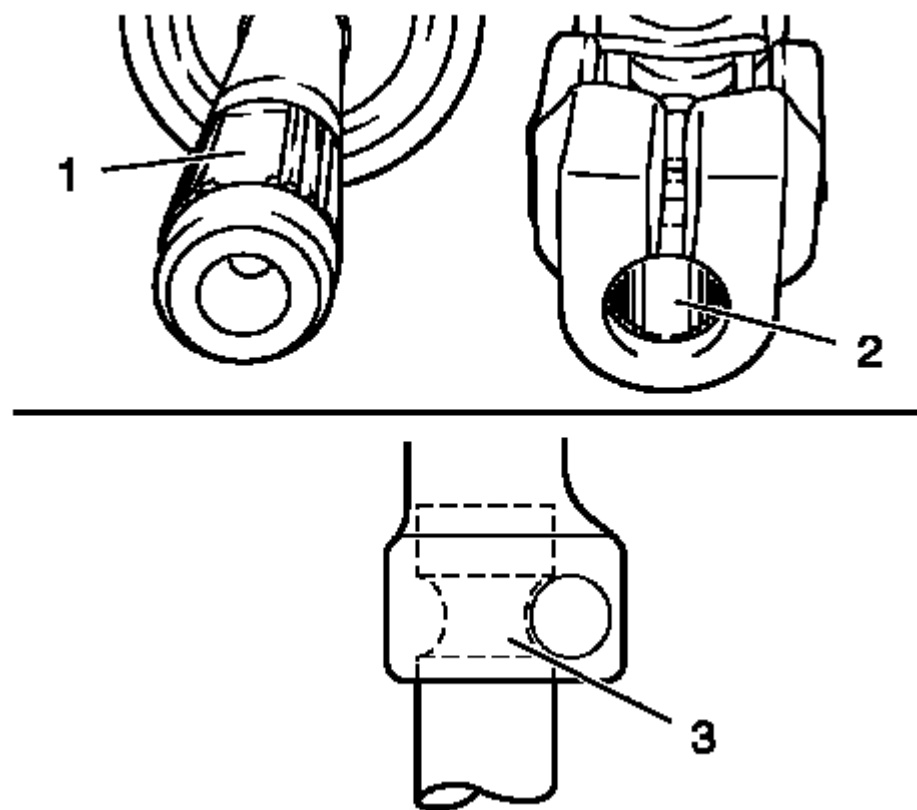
Universal Joint And Steering Pinion Attachment Points
